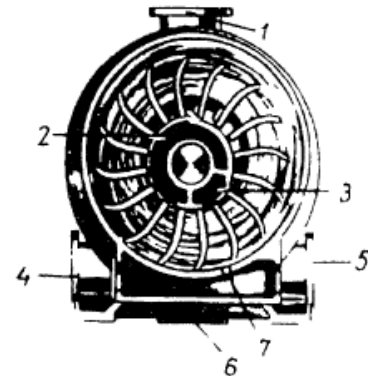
Machine with radial feeder: 1 – suction connection; 2 – suction window; 3 – discharge window; 4, 5, 6 – discharge flange; 7 – water drain from the casing
